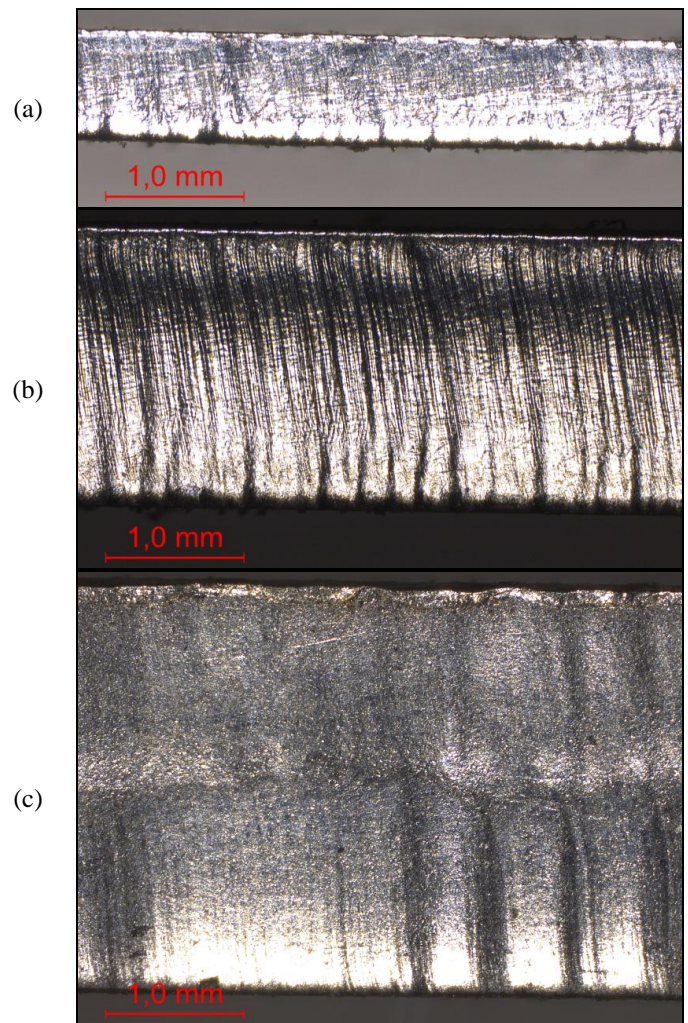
Cutting surfaces for laser cutting with oxygen (a) 0.032" (0.8mm) (b) 0.078" (2.0mm) (c) 0.118" (3mm)
